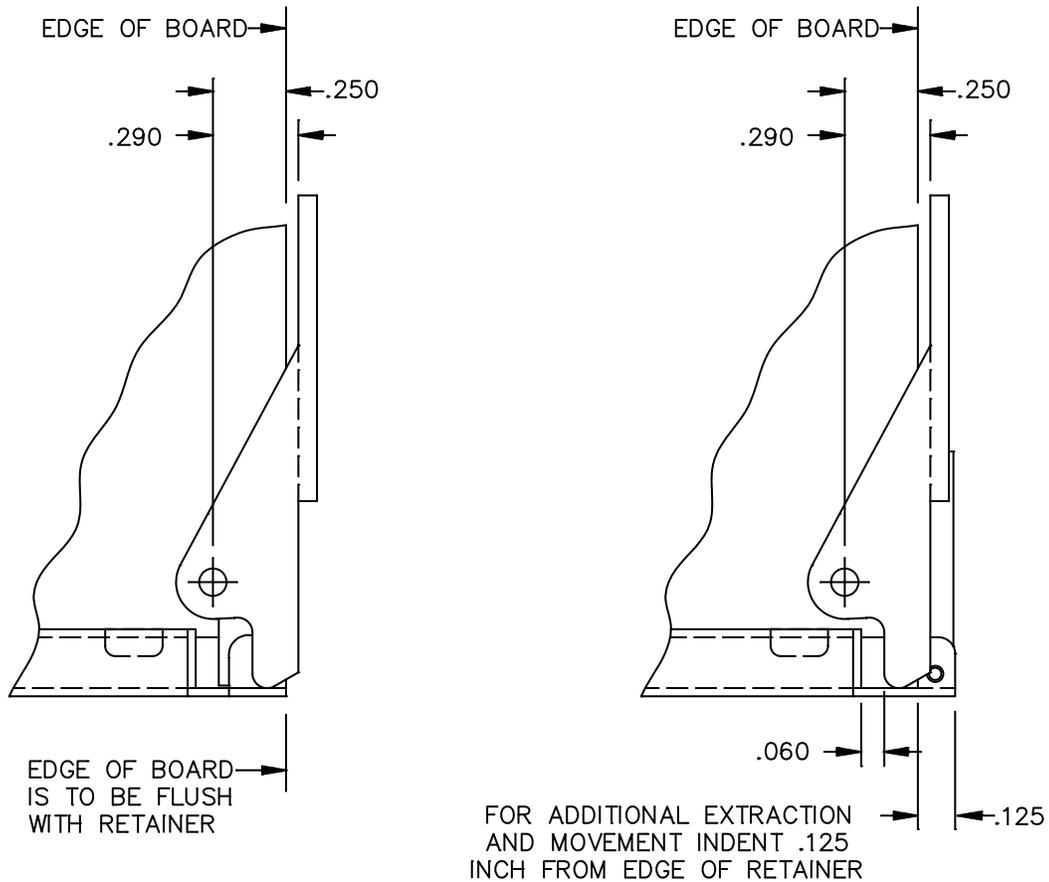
Circuit card assembly to card guide view (right hand extractor shown).
